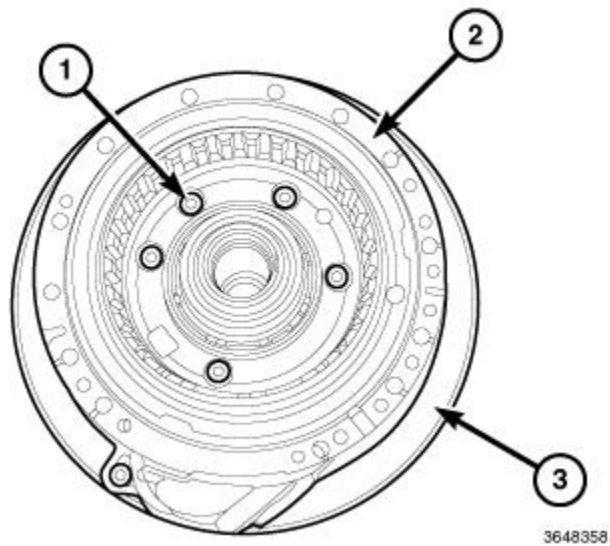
Six Bolts, Oil Pump Housing & Oil Pump Cover
